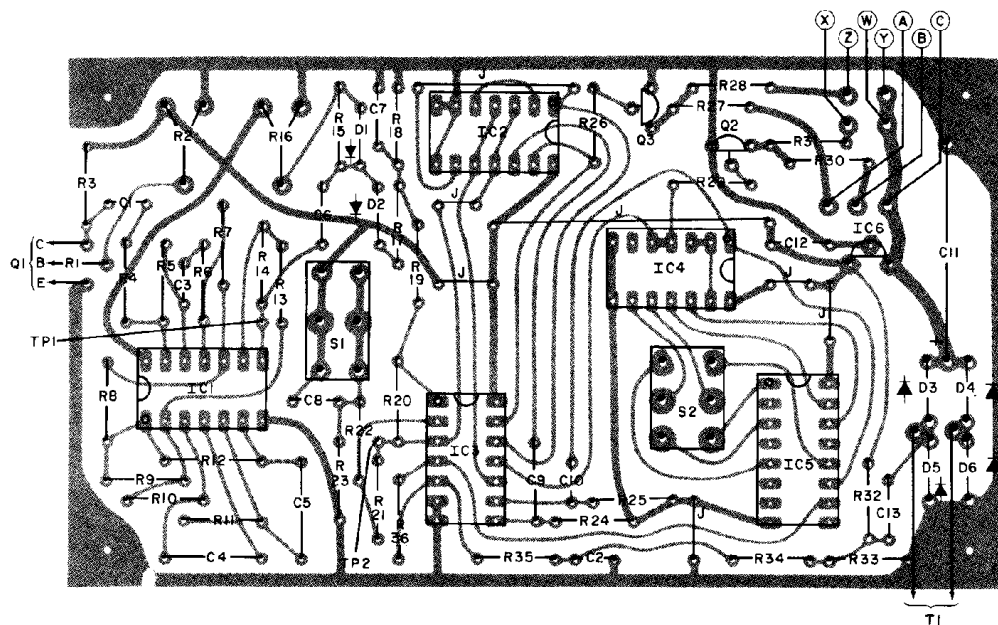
Parts placement guide for the AD*ZAP infrared receiver printed circuit board.
